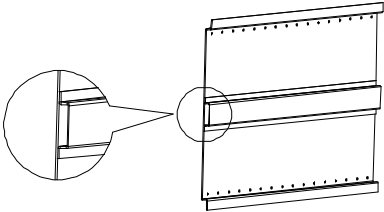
Welding a transverse reinforcement beam on the back of the backplane
